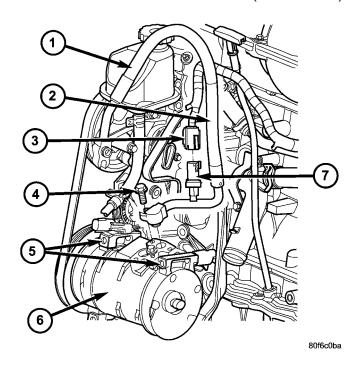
A/C Compressor Removal/Installation 2.4L Turbo
